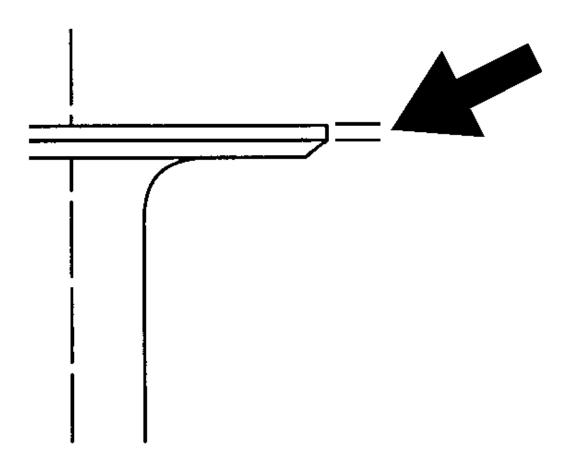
View Of Valve Margin Measurement Courtesy of GENERAL MOTORS CORP.
